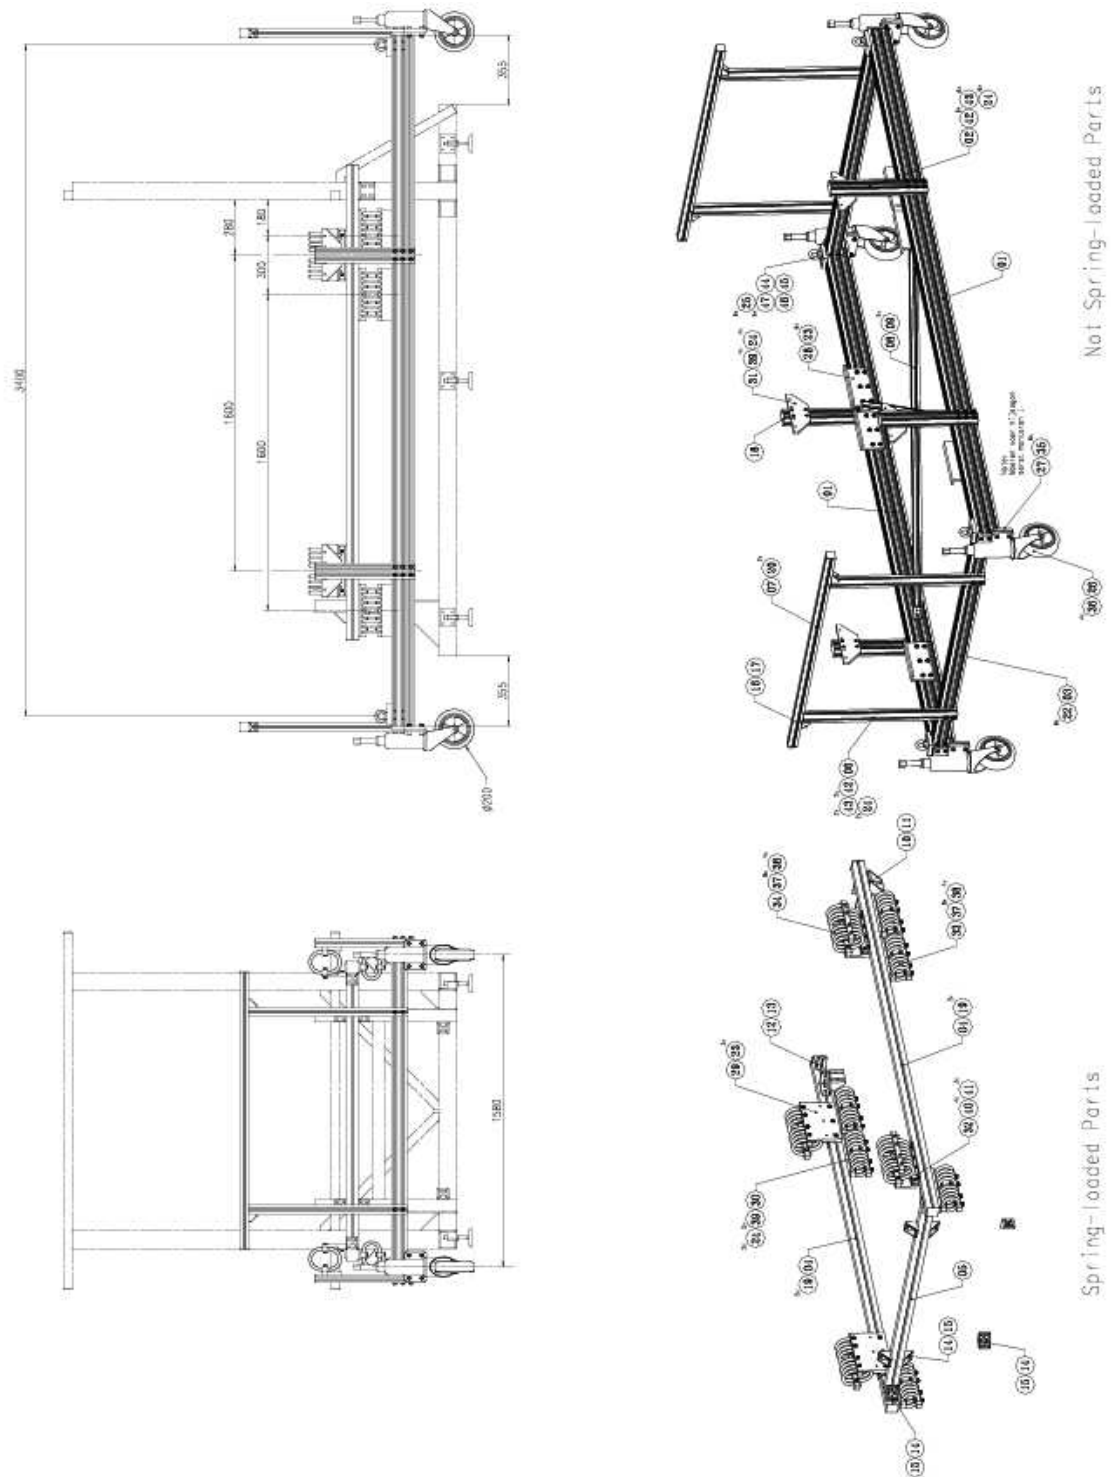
Transport frame which will be added to the assembly frame for the transport (drawing AFX71).
